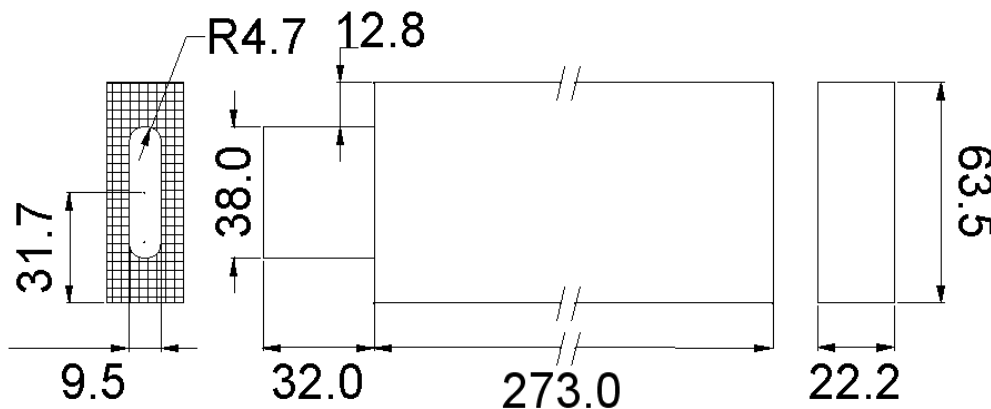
Rail dimensions in mm; overall dimensions of rail and post (22.2 mm × 63.5 mm × 305 mm)
